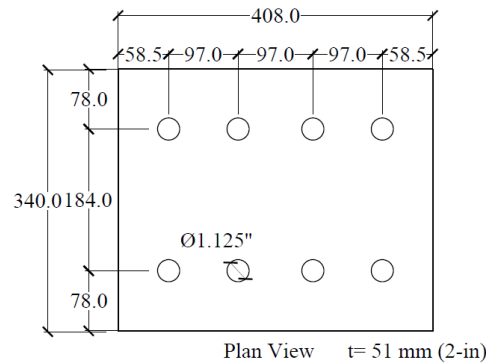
Dimensions of upper and lower aluminum end plate in millimeters.
